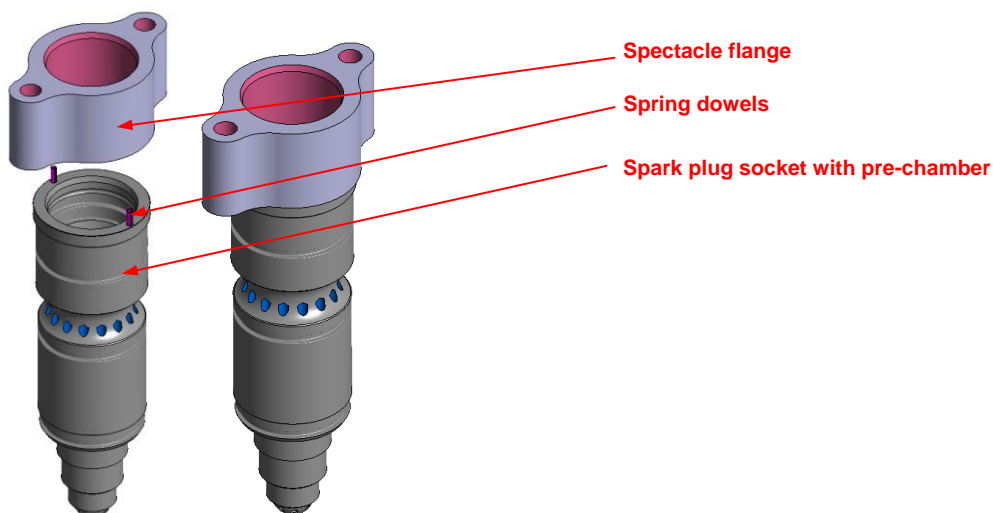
Pre-assembly of spectacle flange, spring dowels and spark plug socket with pre-chamber
